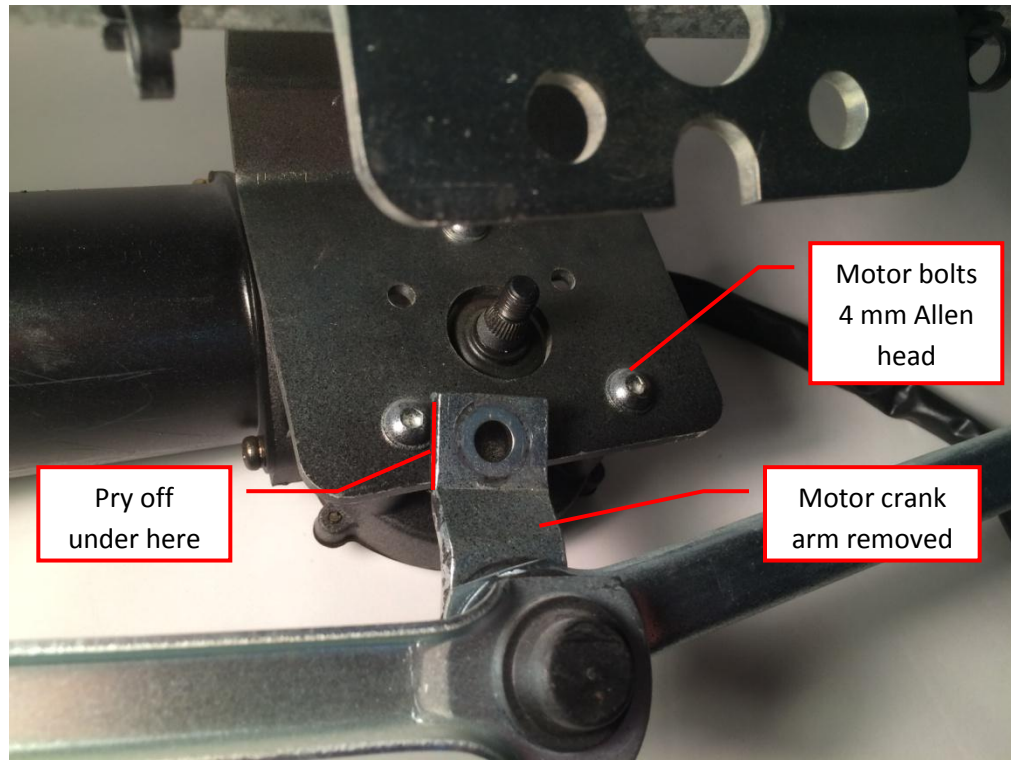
Crank arm removed – 3 motor bolts can be removed
